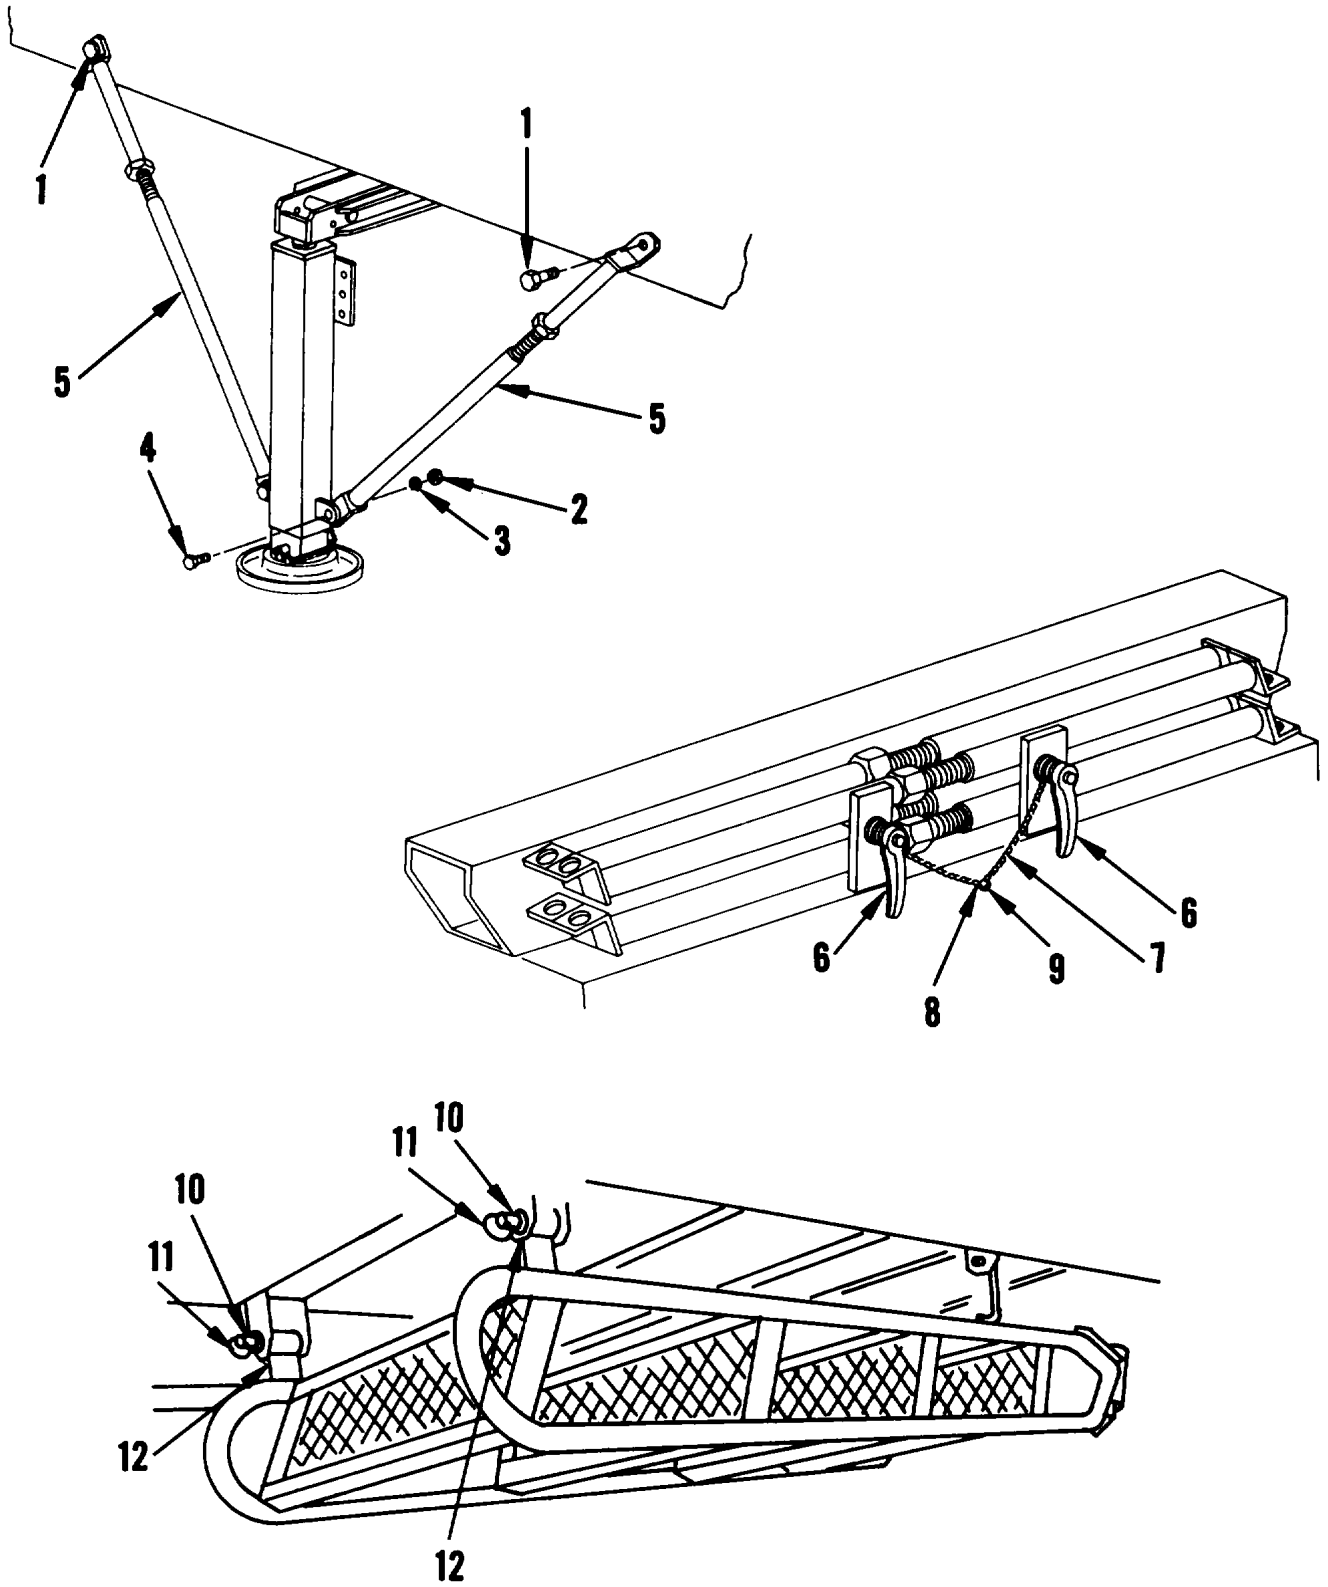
Ladder Stowage, Lifting Brace Stowage, Lifting Jack Installation
